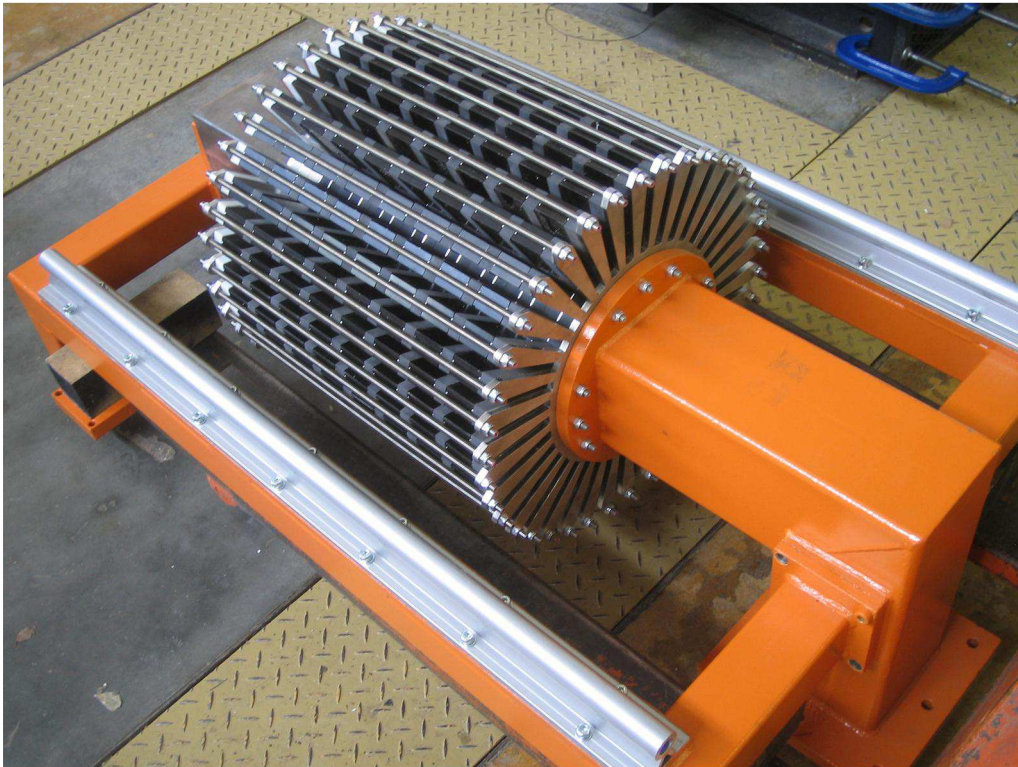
The completed translator, mounted horizontally on a steel frame; the linear bearings for the stator is mounted on the sides of the frame.
